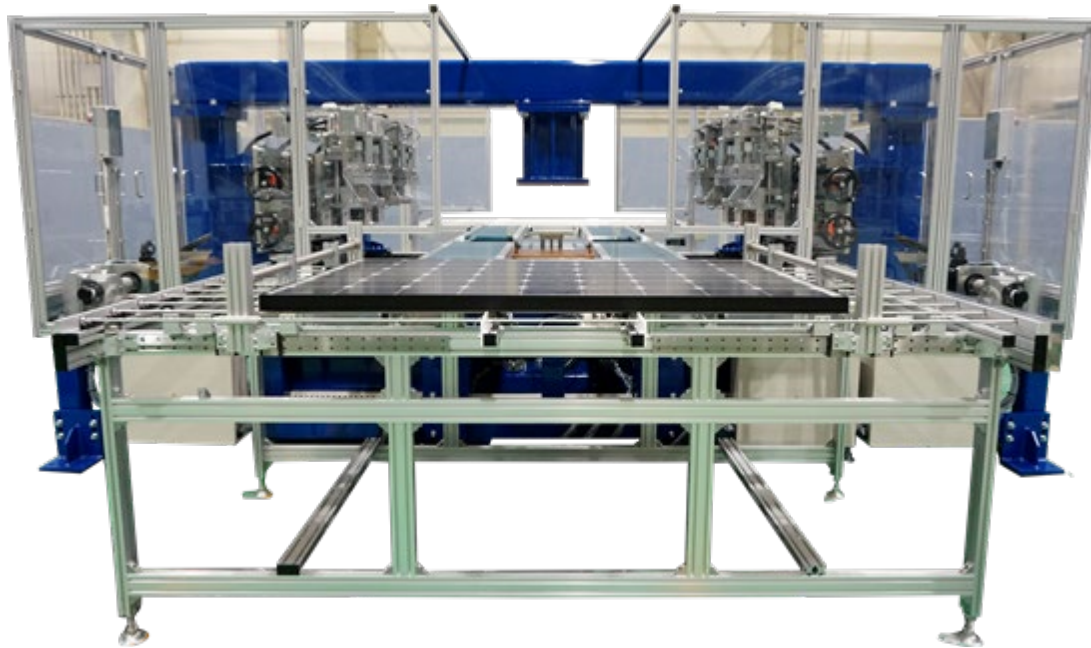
Aluminium frame removing equipment (Photo courtesy of NPC Incorporated)
